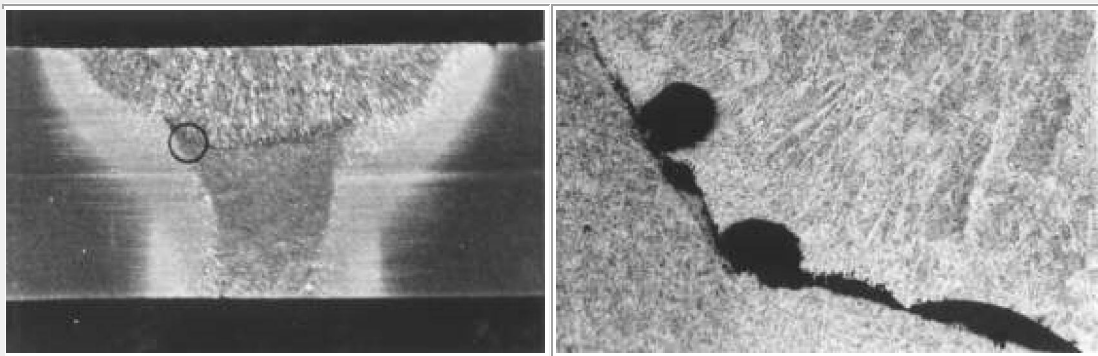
Inclusions at the faces sticking together. a) The macrograph shows lack of fusion between the central and final runs; b) The micrograph shows inclusions at the faces stuck together.
